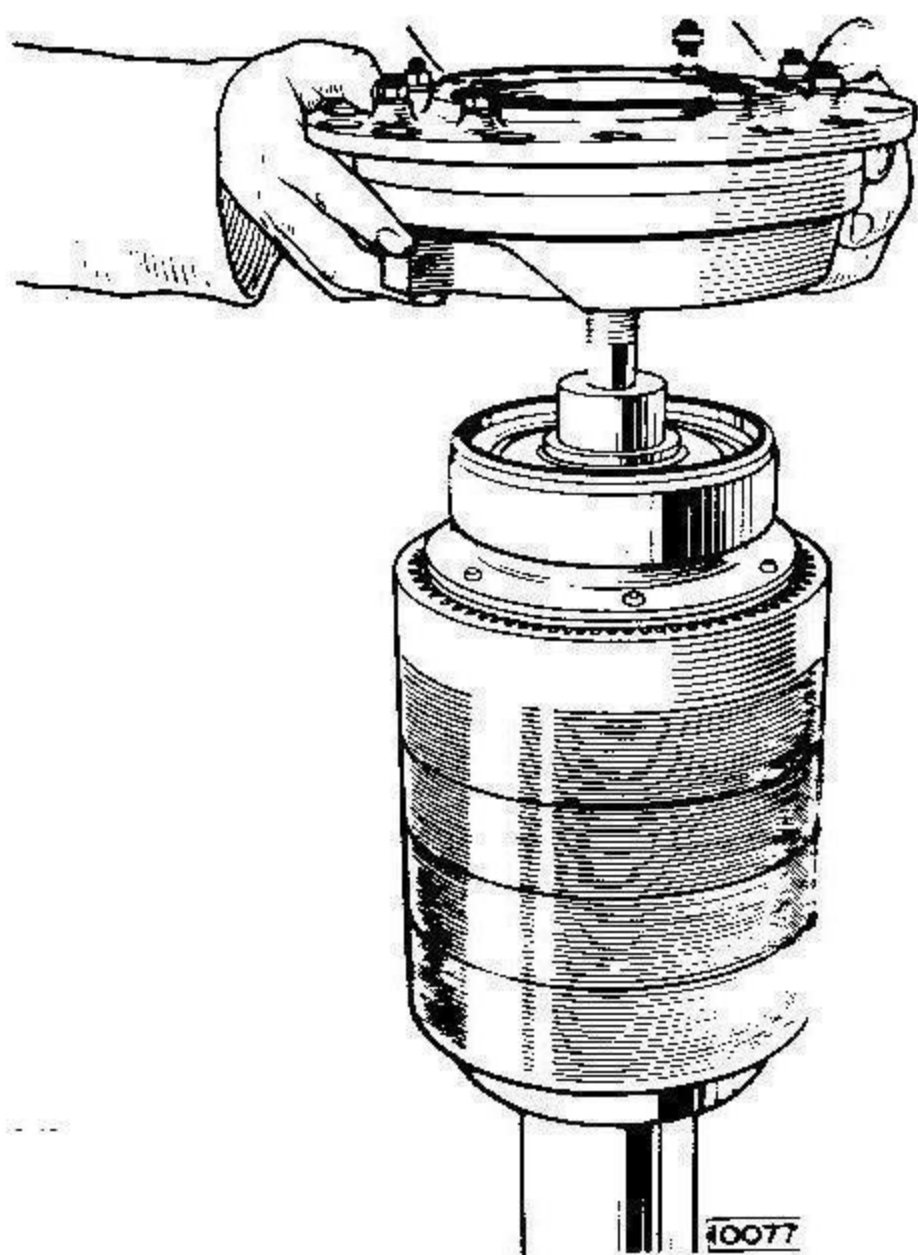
Fitting the rear cover. The inner actuating ring must be held in position
